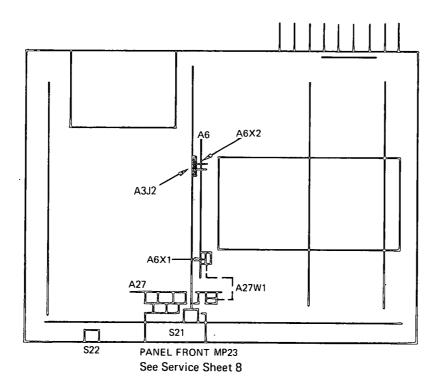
3. Location of additional/changed parts and assemblies for 8015A Option 002.
